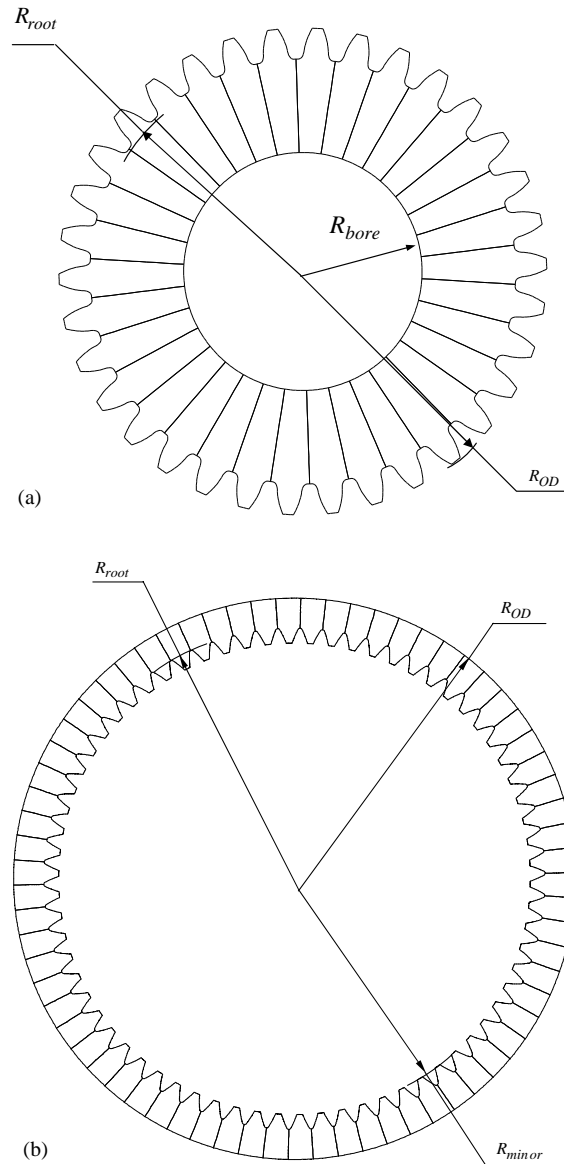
Dimensions required for the definition of the rim thickness parameters for (a) an external gear and (b) an internal gear.
